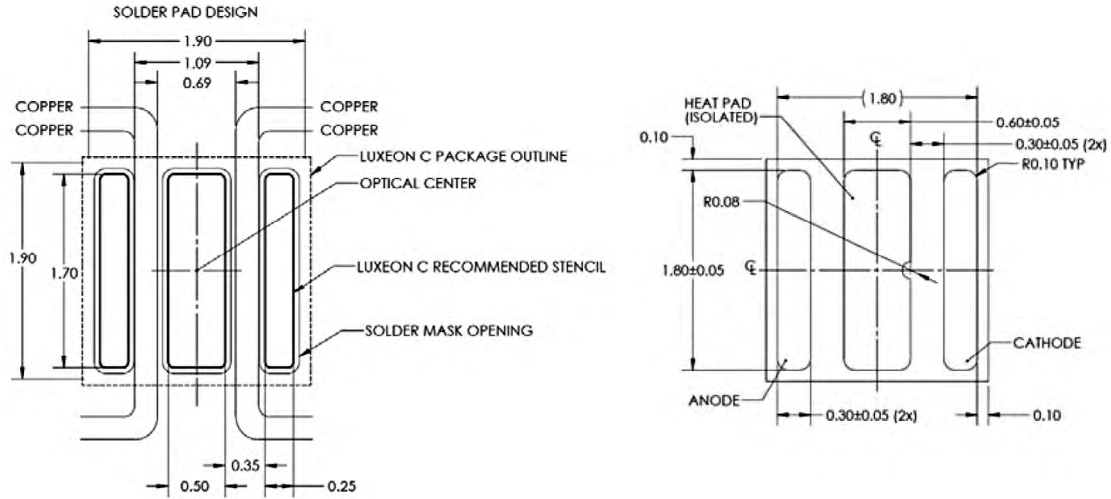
Recommended PCB solder pad layout for LUXEON C Color Line.
